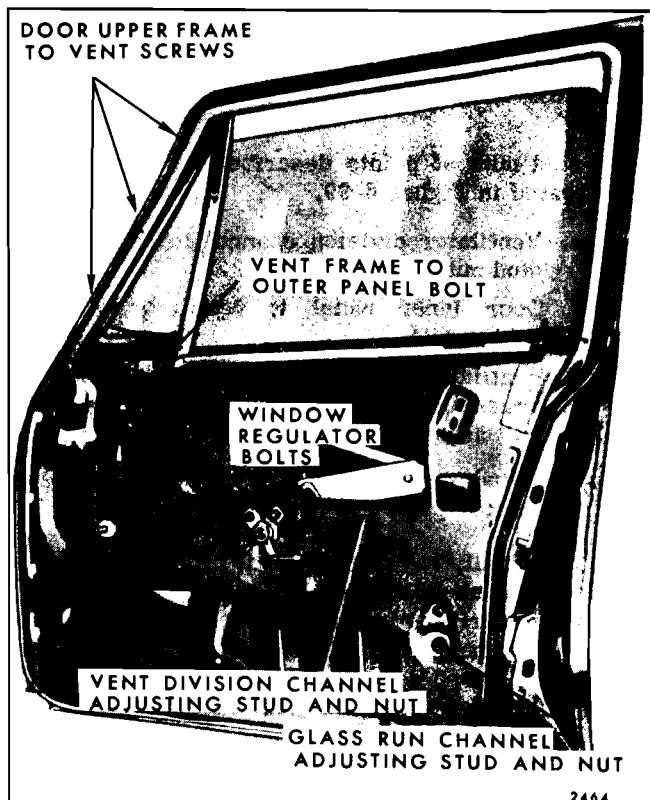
Door Ventilator and Regulator Attachment - "A" Styles
